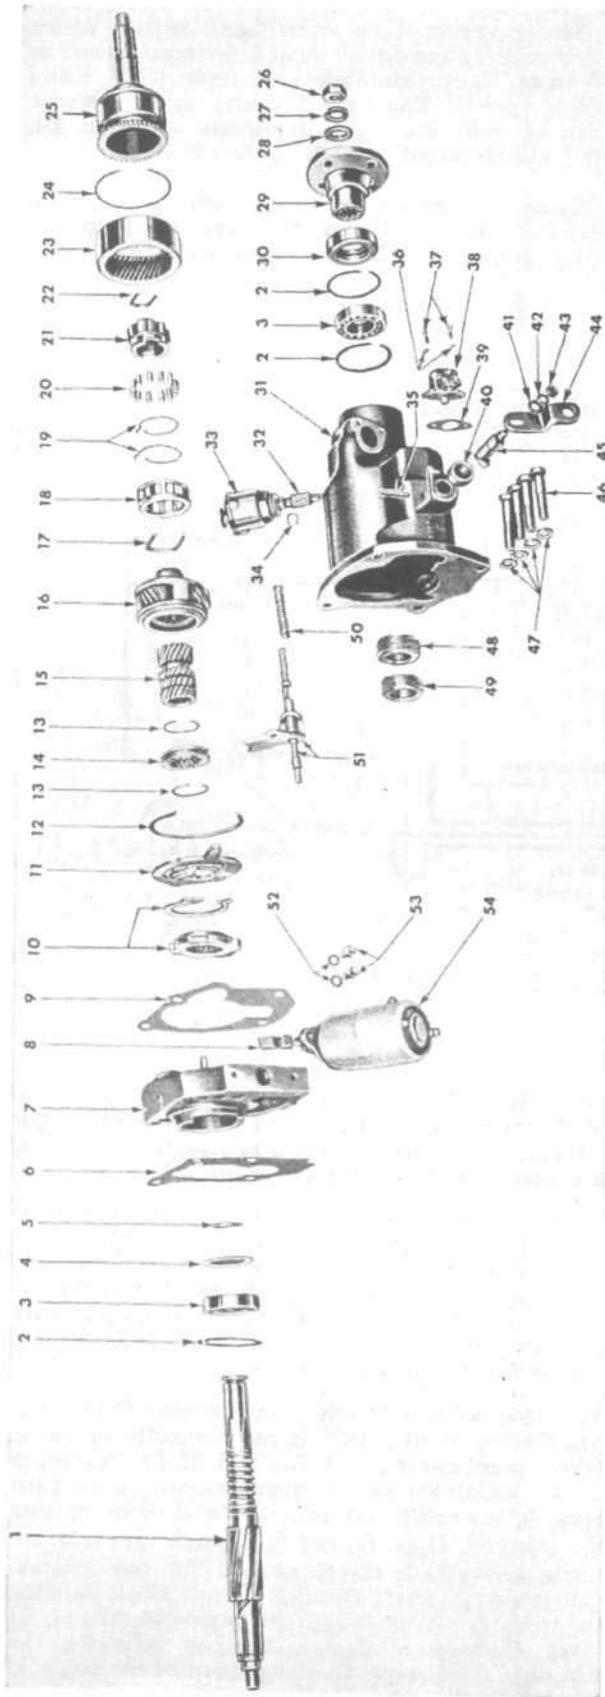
TRANSMISSION OVERDRIVE—EXPLODED VIEW
